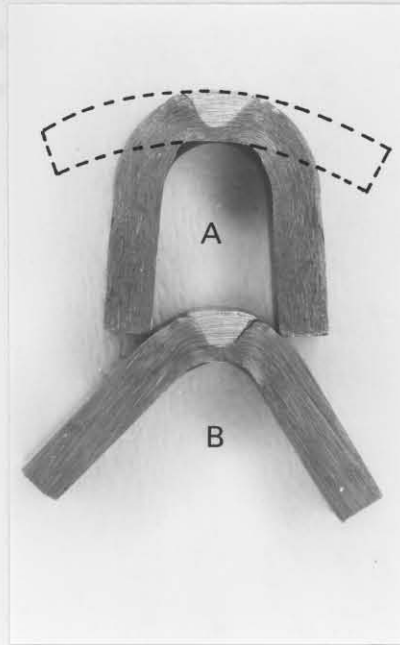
Hot rolled-and-tempered (A) and hot rolled (B) 3CR12 bead-on-plate bent specimens welded with 316L.
